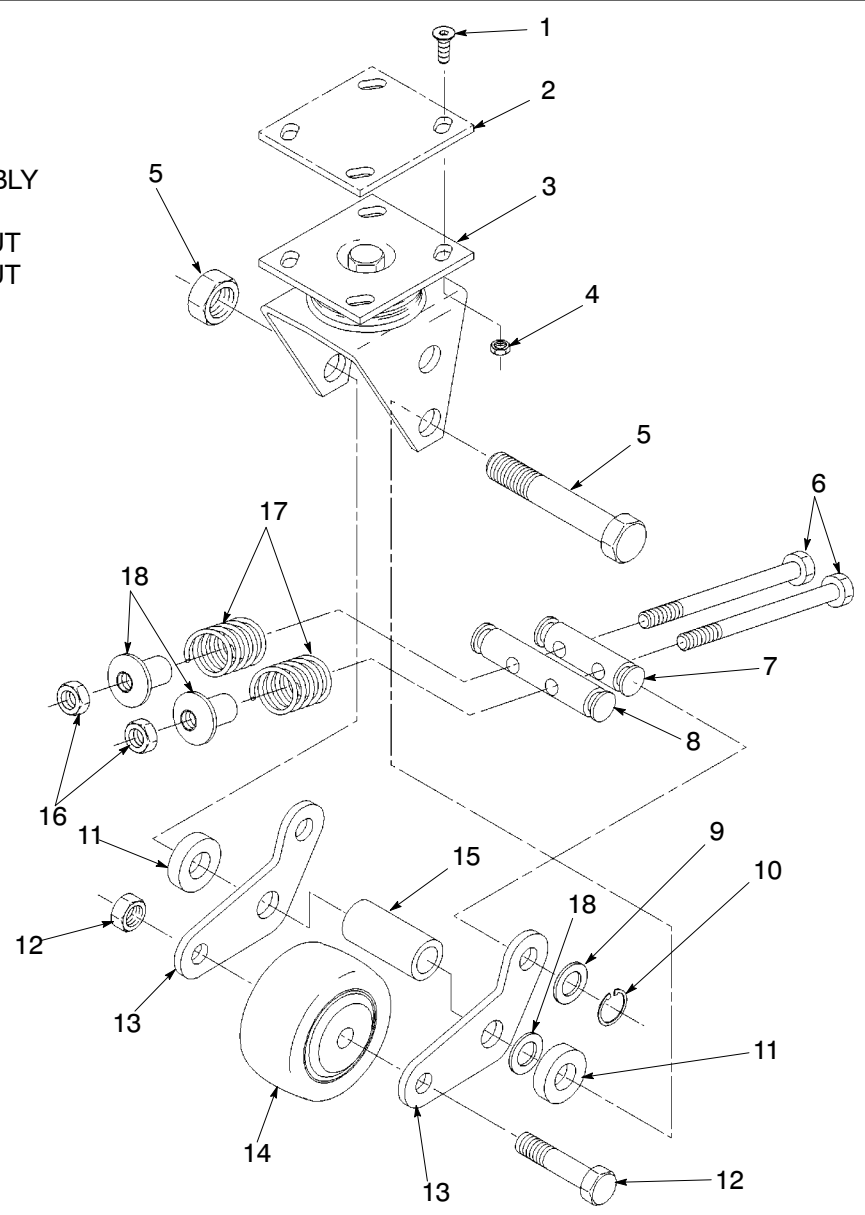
CASTER - W40XT, W45XT, W/B/C60-80XT
